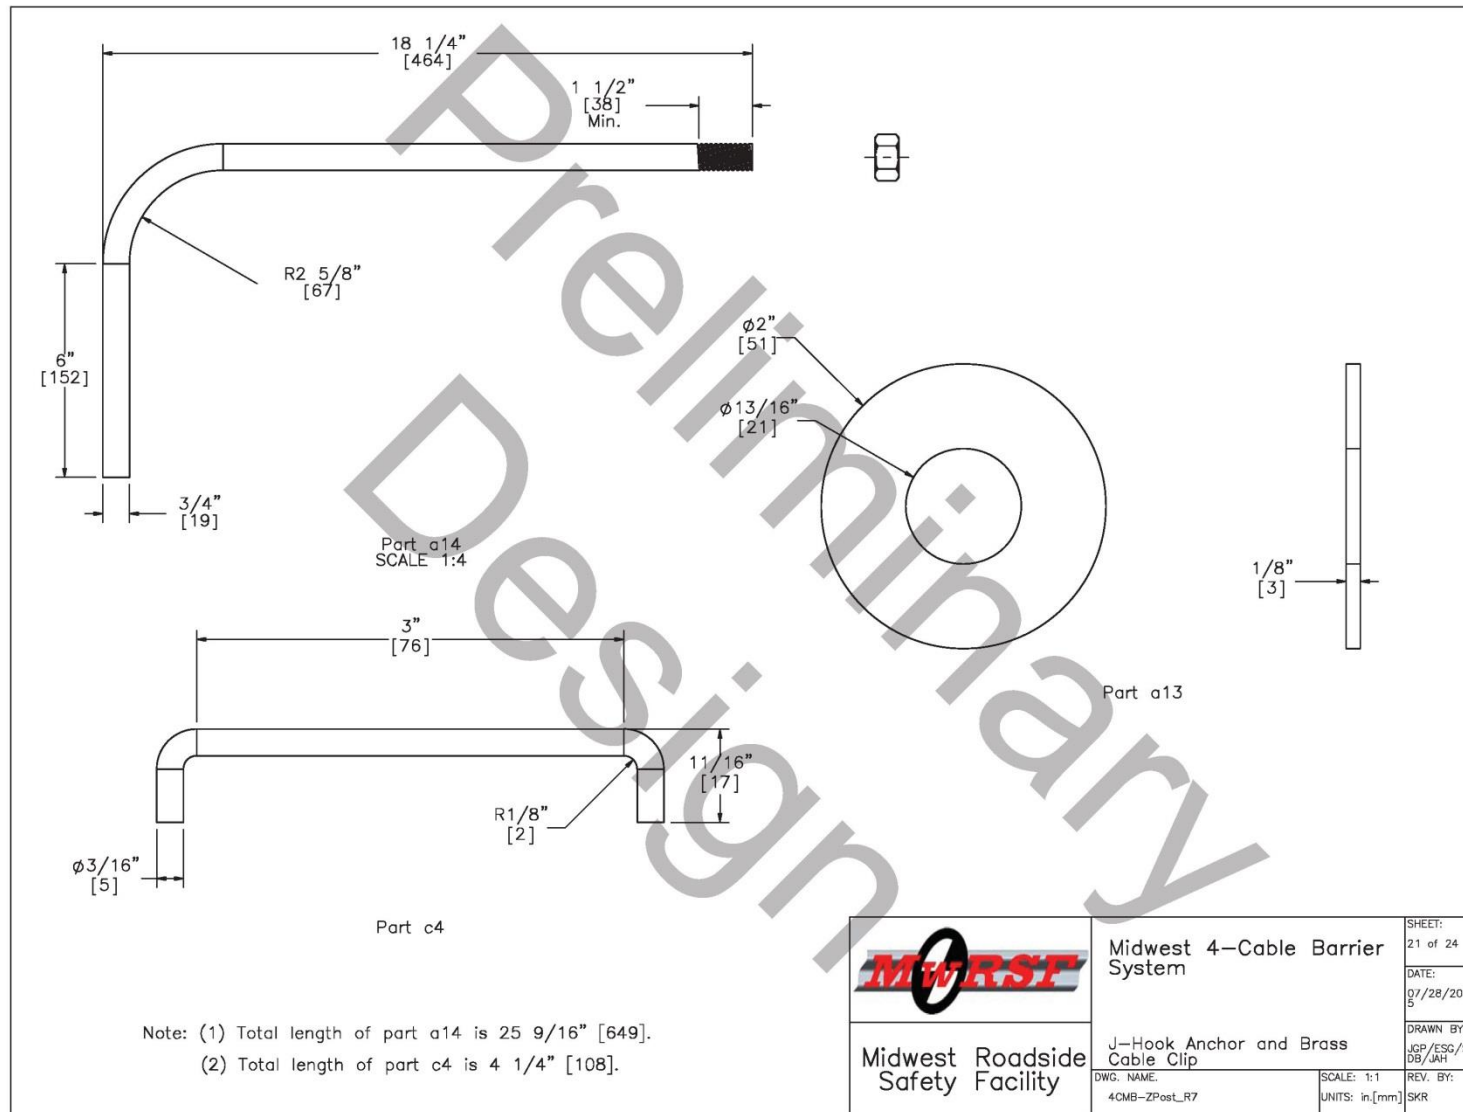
J-Hook Anchor and Brass Clips, Test No. MWP-1
